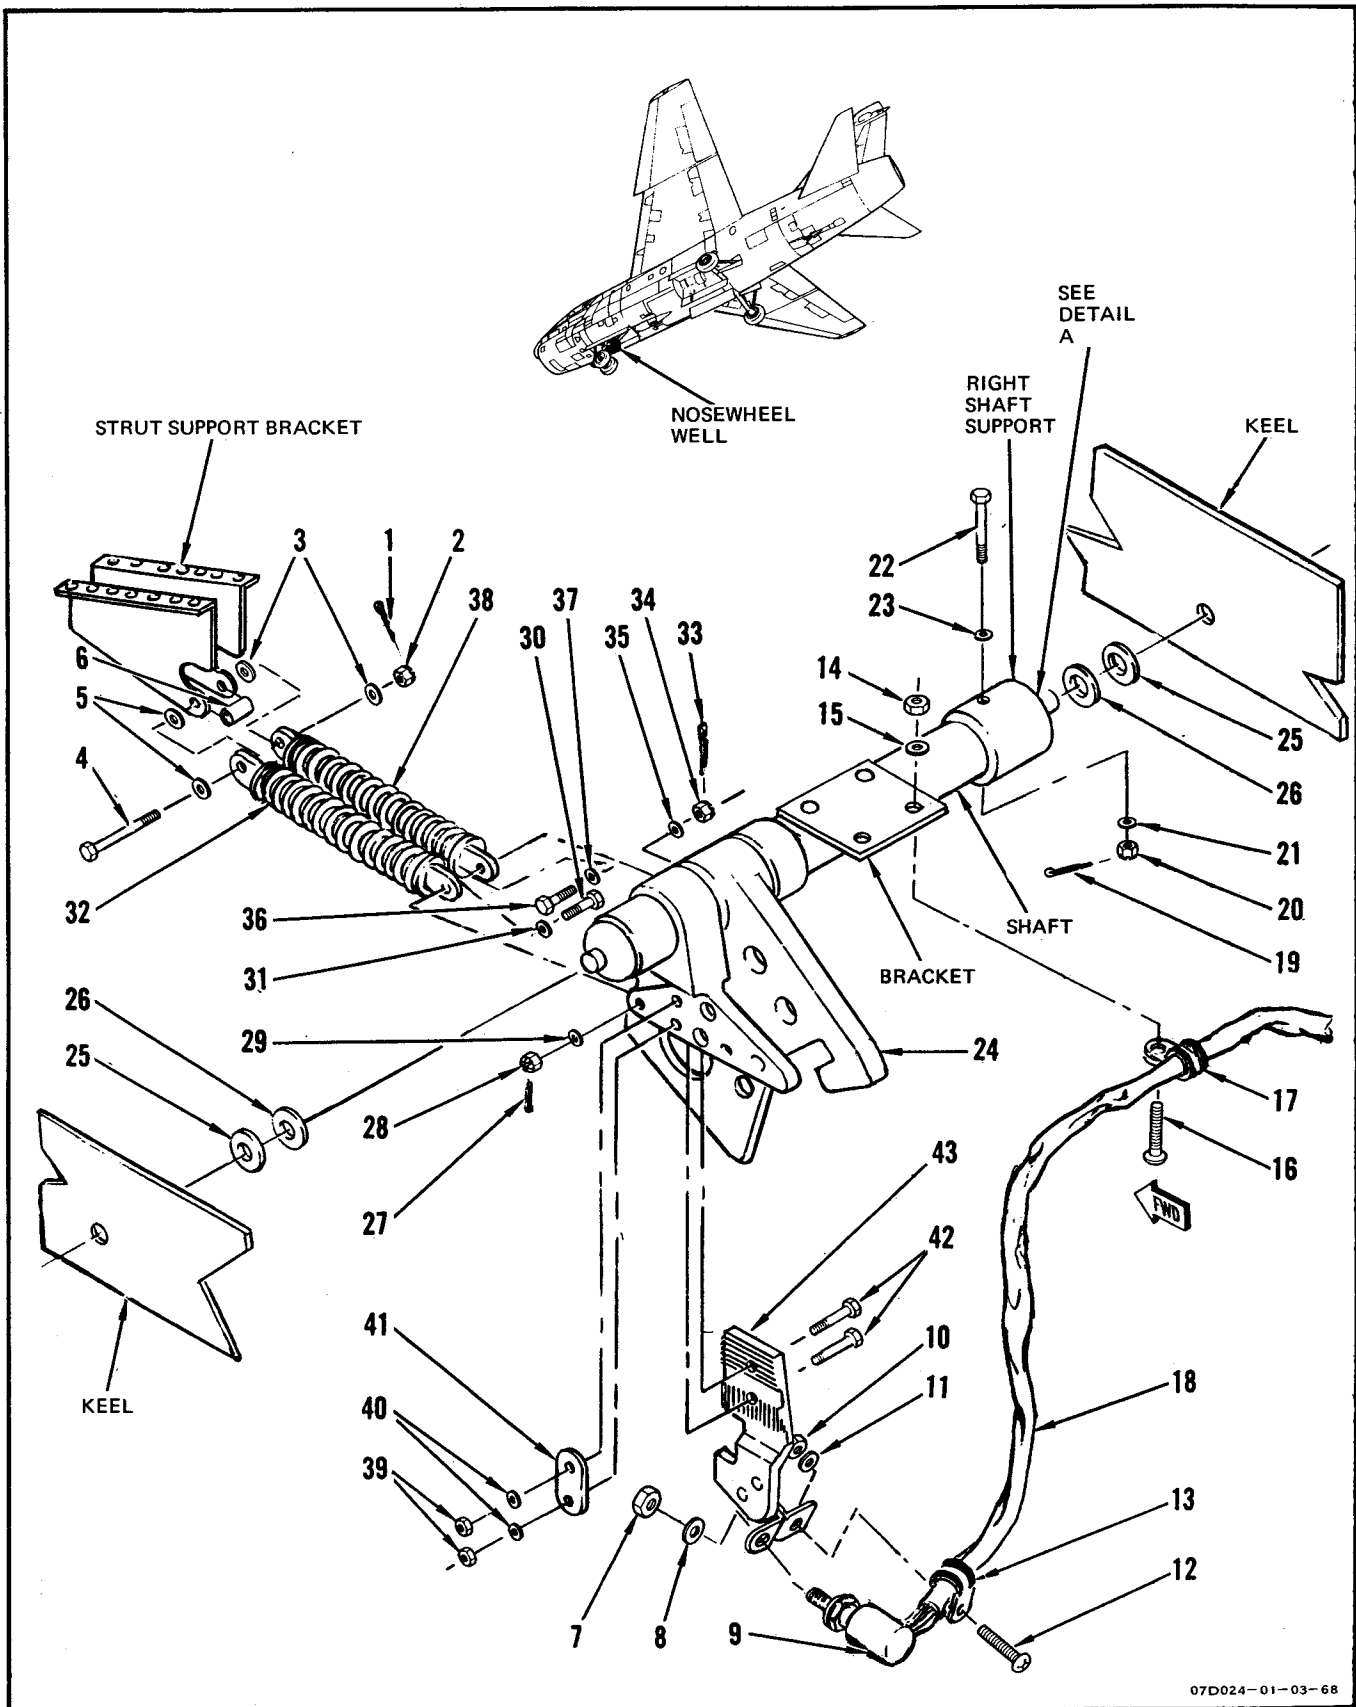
Nose Gear Uplock Removal and Installation (Sheet 1)
